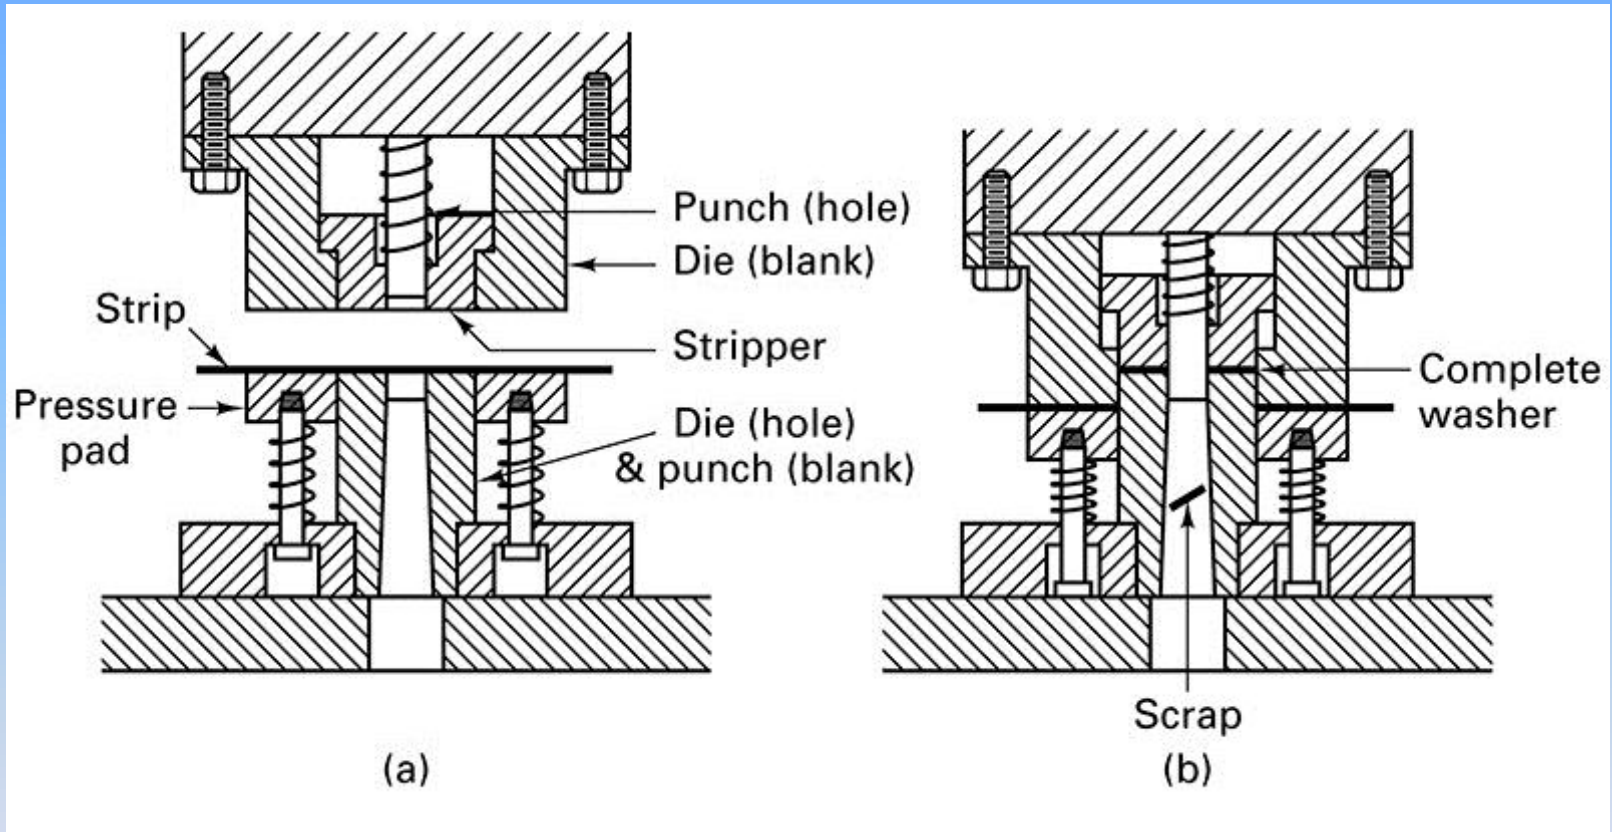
Method for making a simple washer in a compound piercing and blanking die. Part is blanked (a) and subsequently pierced (b) in the same stroke. The blanking punch contains the die for piercing.
